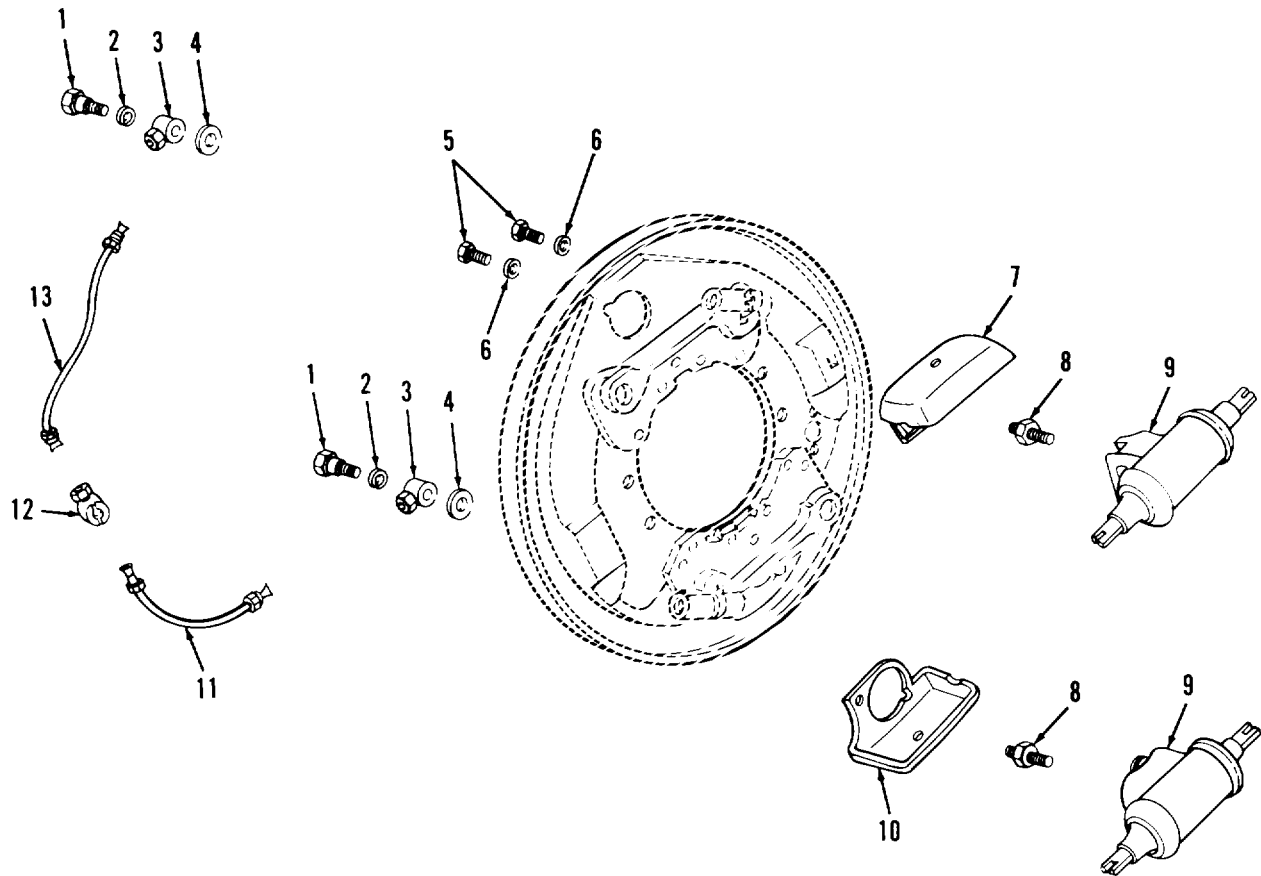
WHEEL CYLINDER AND RELATED PARTS (M390C).
